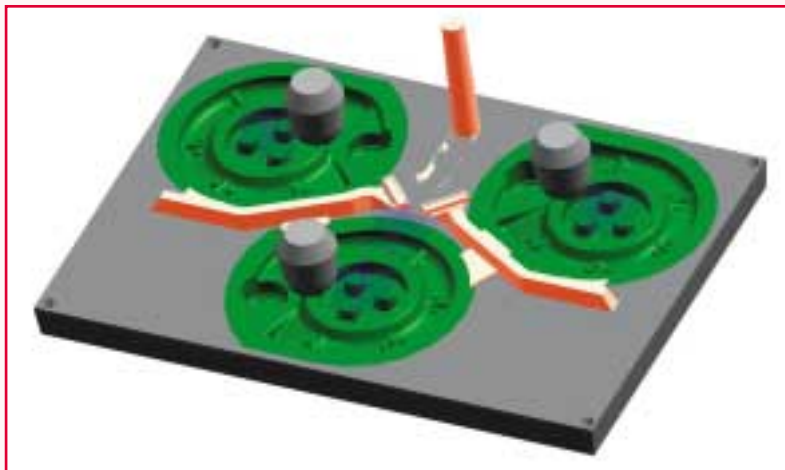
Casting example 3 (CAD model of a Forest Machinery Casting)
